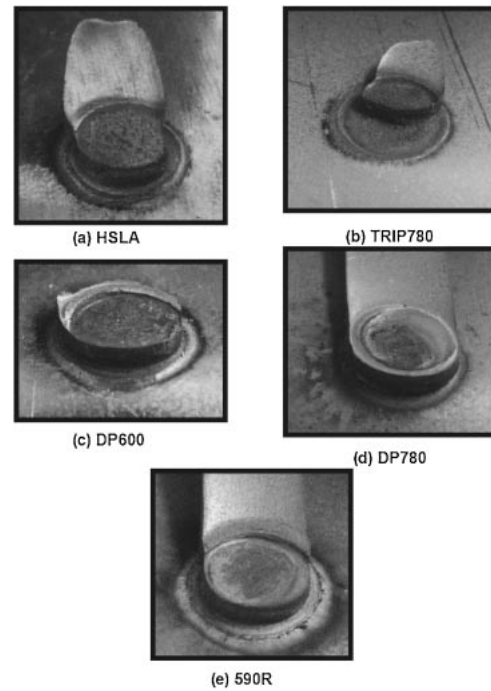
Fracture surface for coach peel test specimens.
